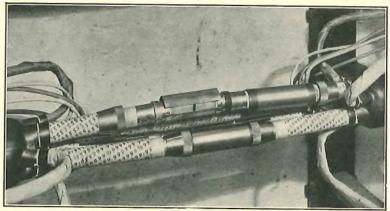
Construction of Joints in 0.975 Inch Tubes.
